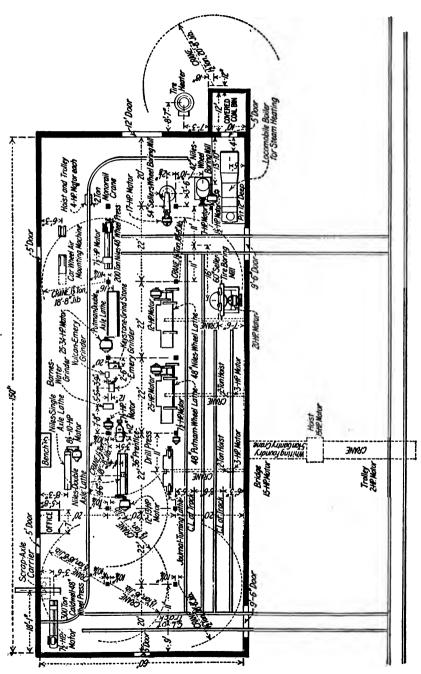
Plan of wheel shop showing machines, motors, and cranes.
